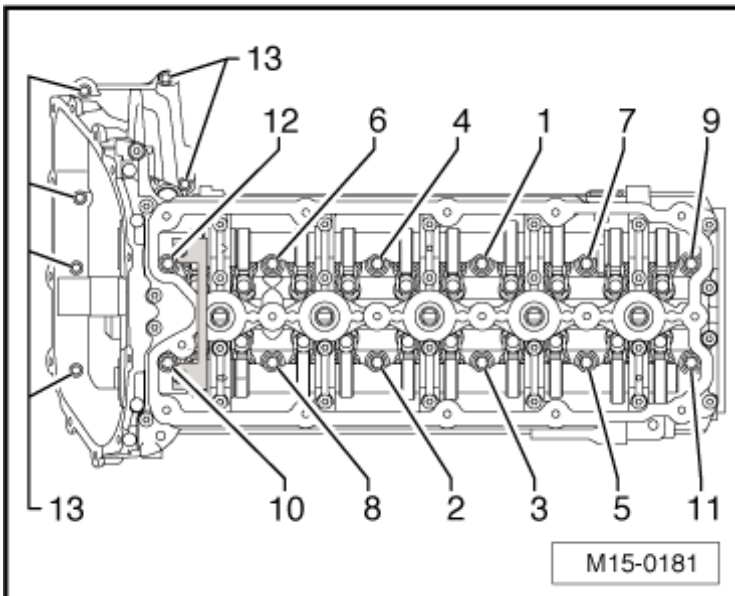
Identifying Cylinder Head Bolts Tightening Sequence
